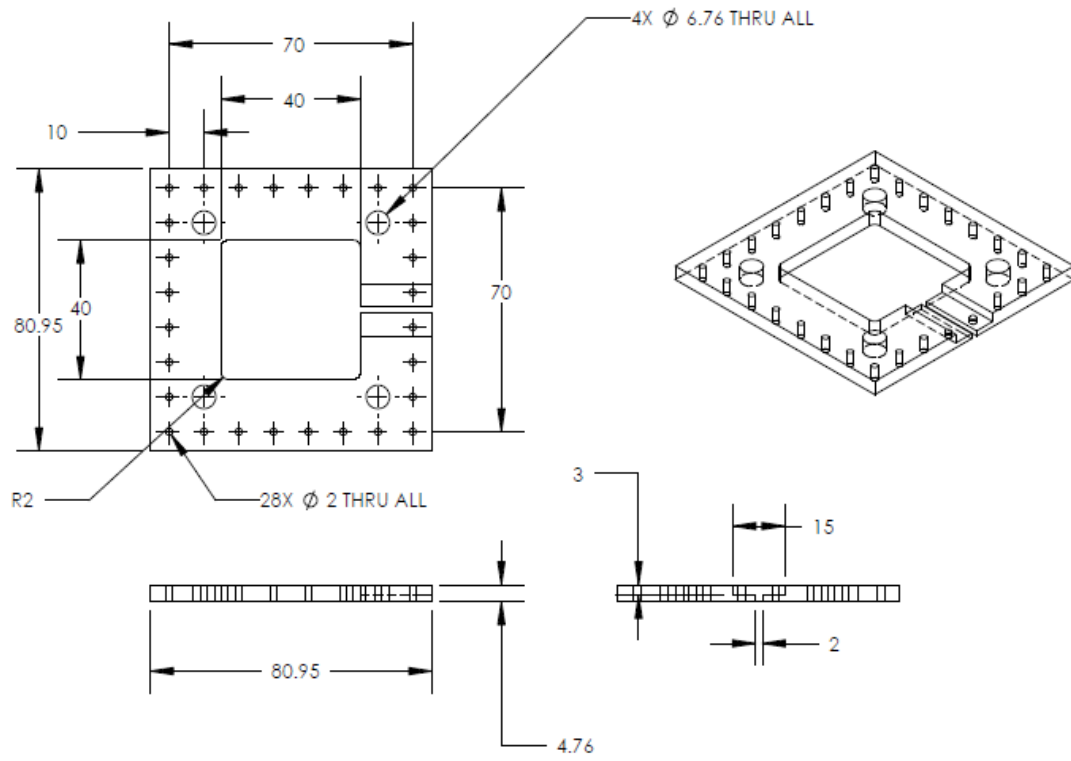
CAD drawing of the perforated gas diffuser plate (all measurements in mm).
